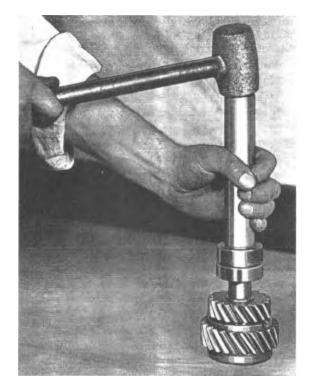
Installing Main Drive Gear Ball Bearing— J-779 Bearing Installing Tool
